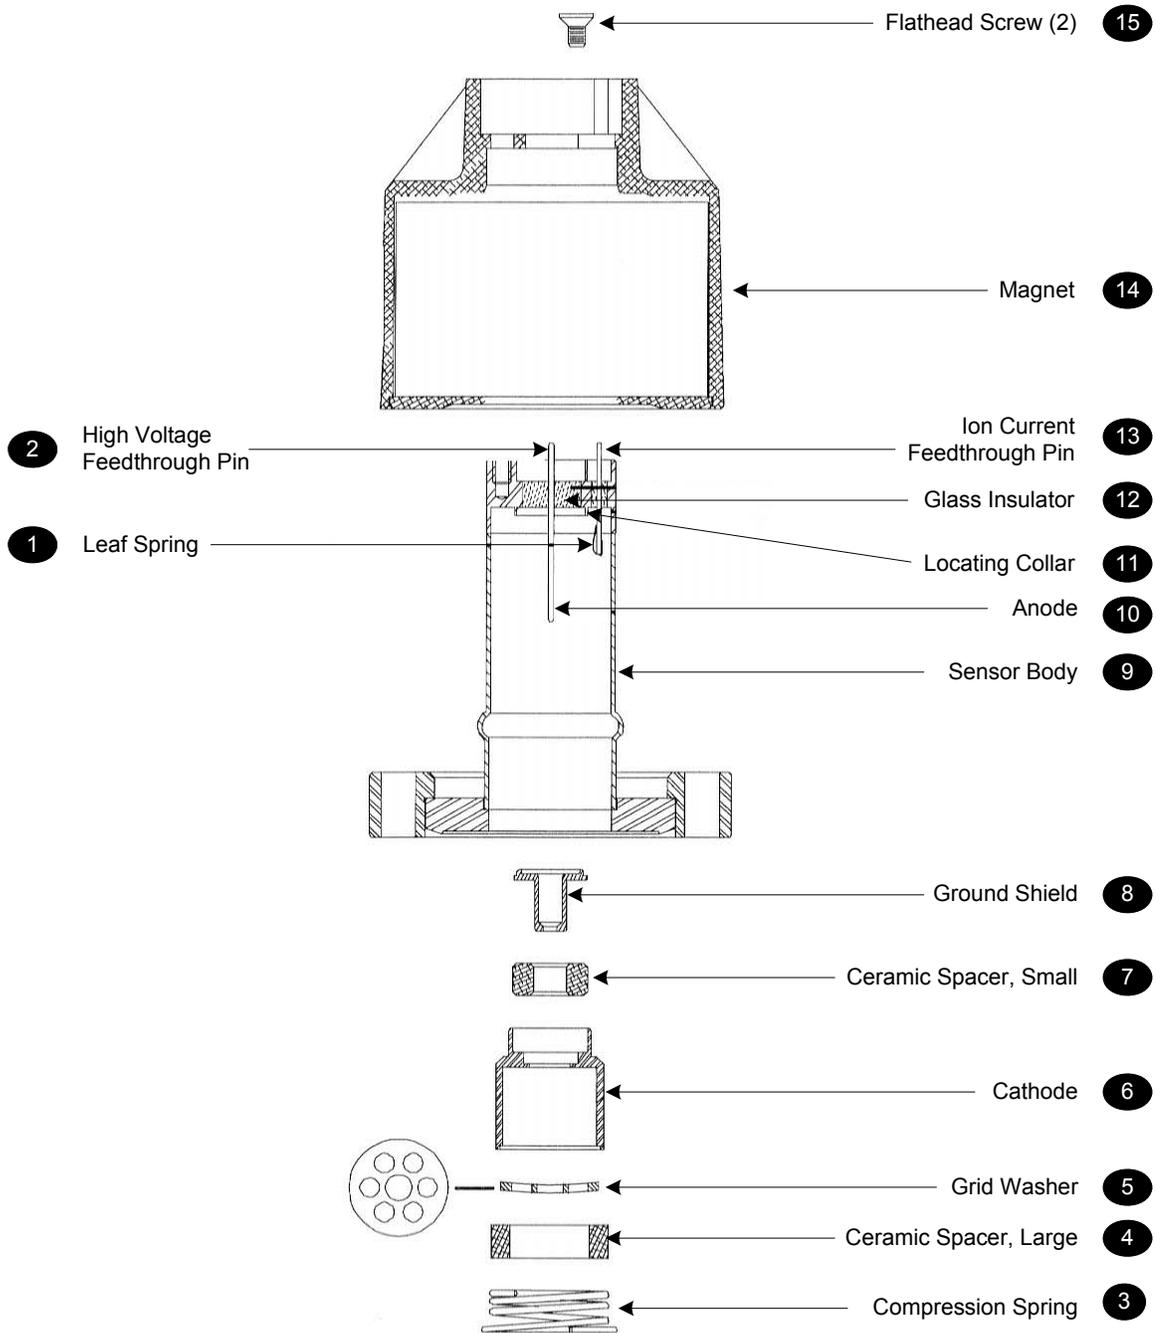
Exploded View of the Series 423 I-MAG Cold Cathode Gauge Sensor
